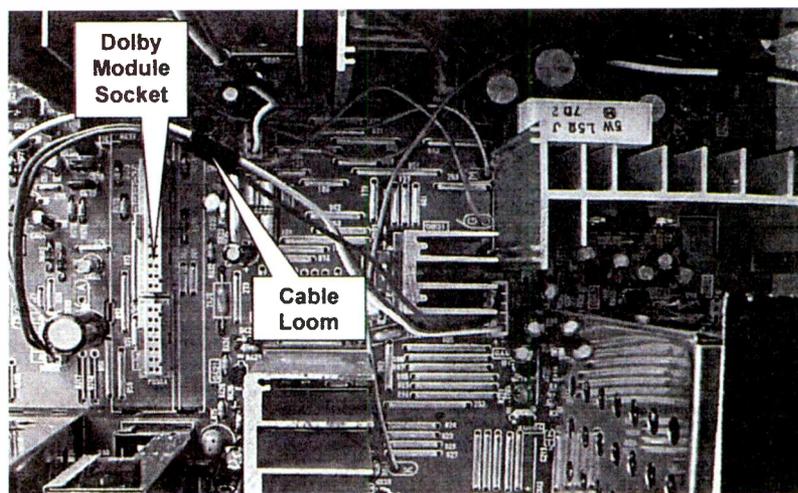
Position of the five-wire cable loom on the component side of the signals PCB.
